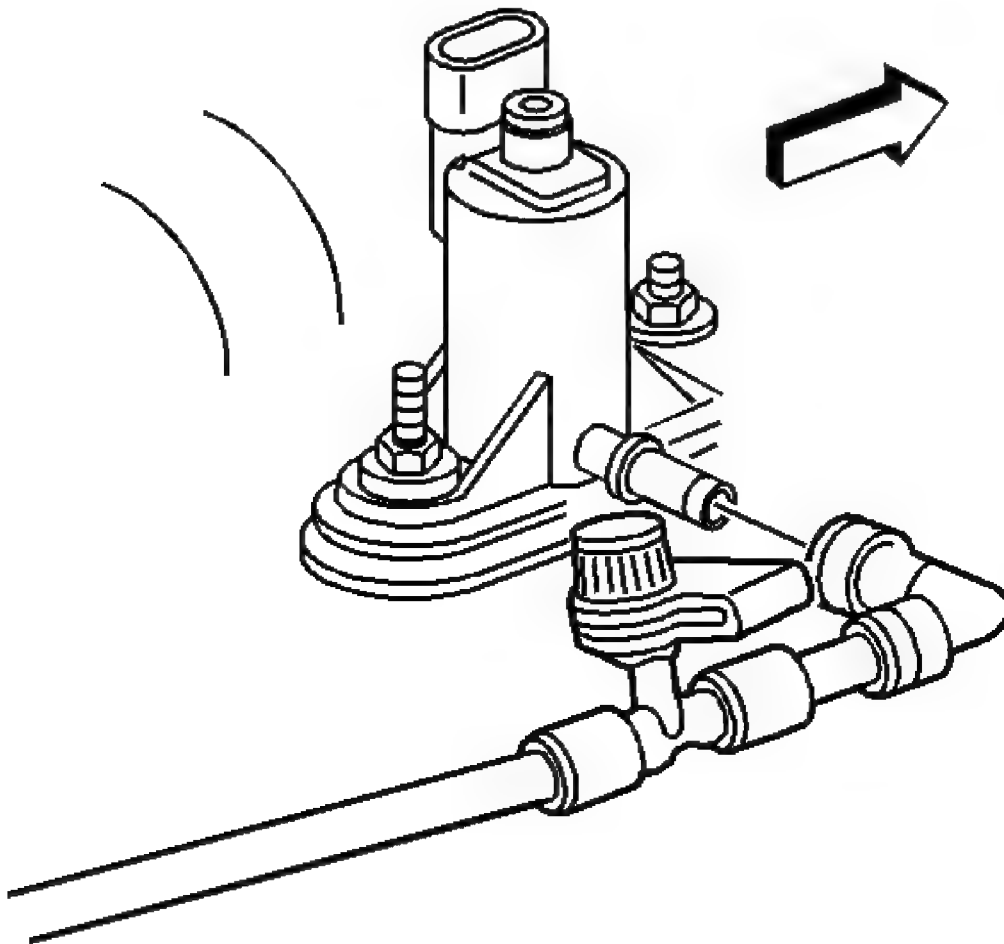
View Of Evaporative Emission Canister Purge Solenoid Valve Harness
